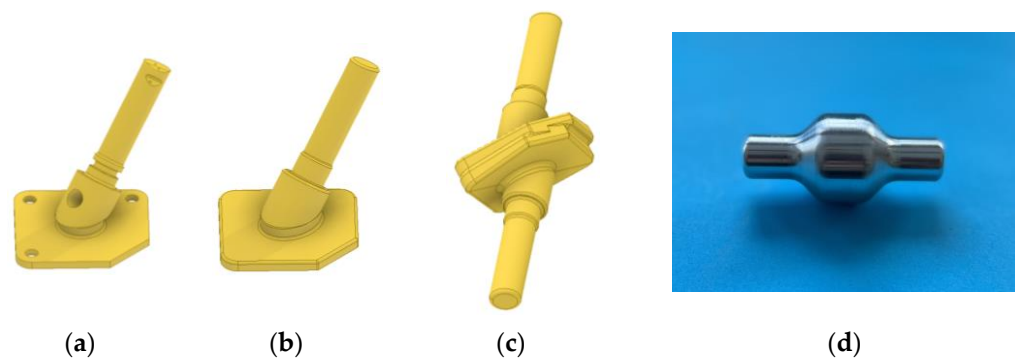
The geometry of the finished (a), forged (b), twin forged (c) parts and the workpiece (d).
